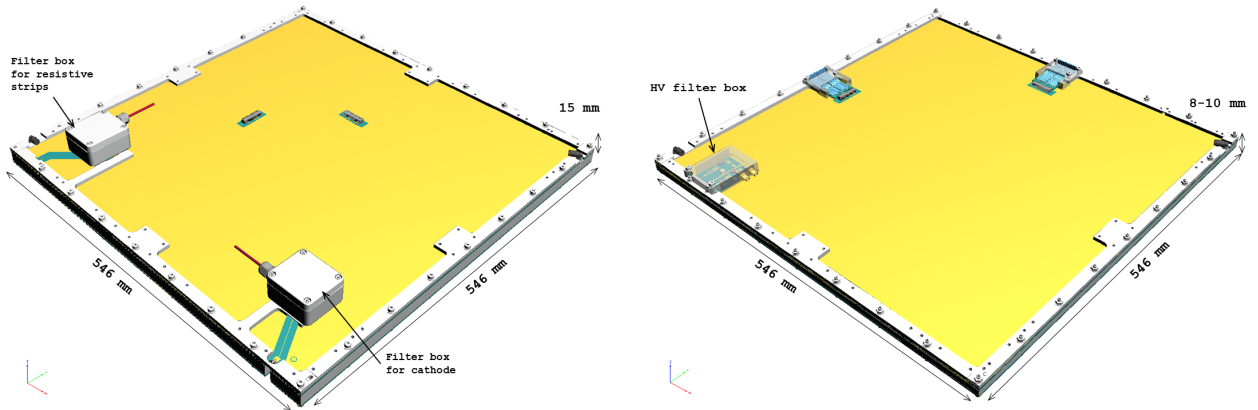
3D CAD drawings of Mutigen v2 [left] and Multigen v3 & v4 [right].
